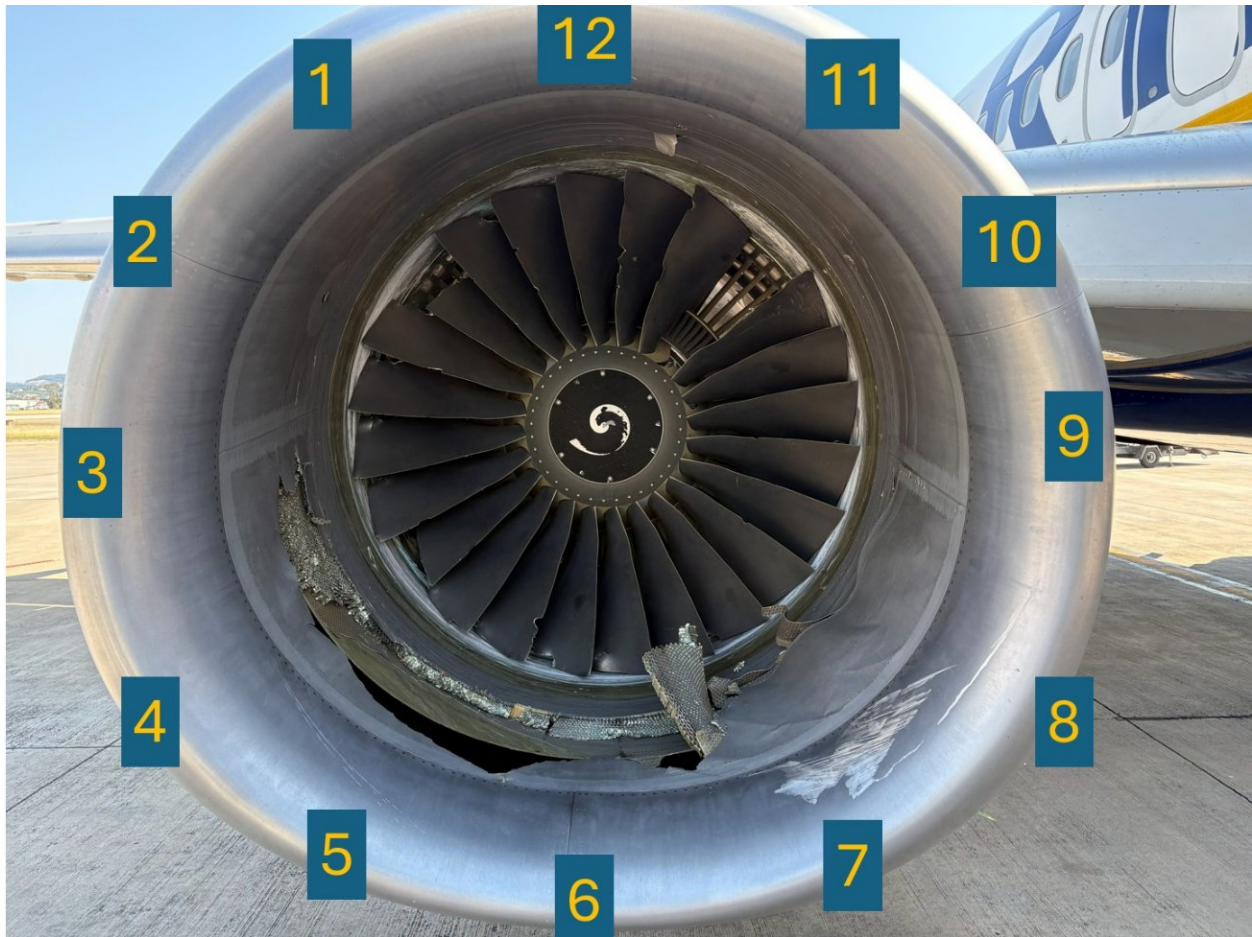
View of the No.2 (right) engine inlet. View is looking aft.
